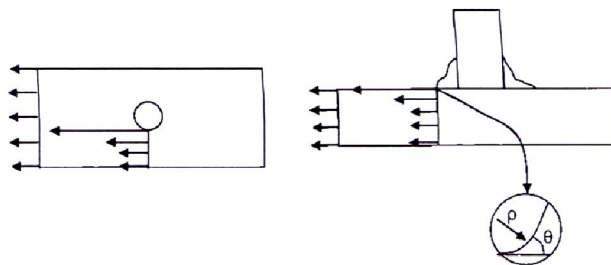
Notch effect at the edge of a bore hole and at the weld toe [22]
